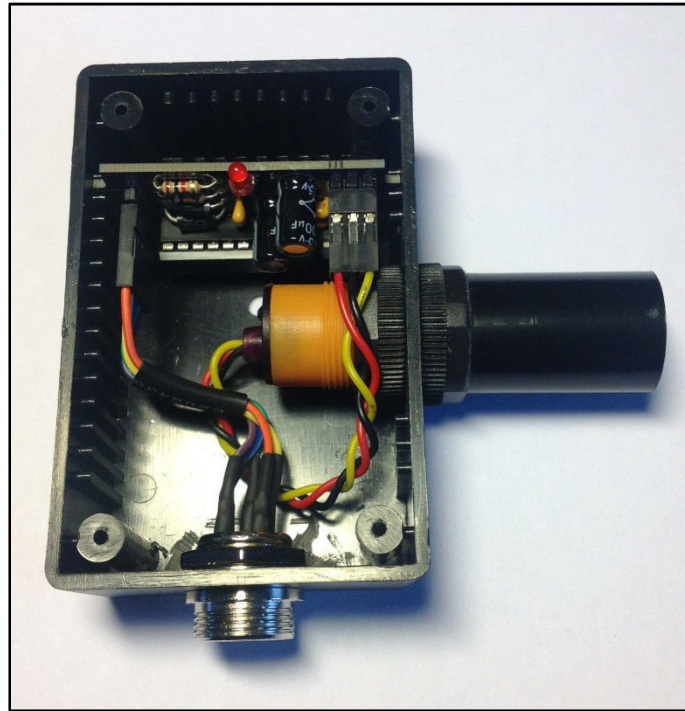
One Bell Simulator Interface PCB & Sensor Mounting
